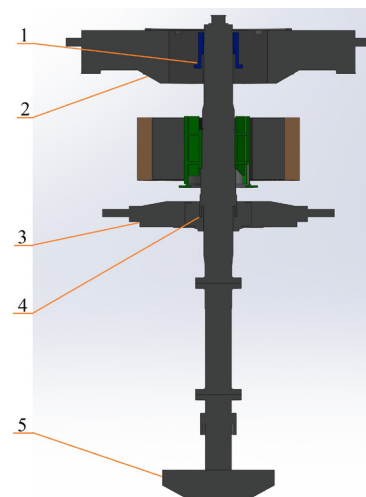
Three-dimensional model of the structure of the reconstructed hydrogenerator-motor in a cross-section: 1 – upper bearing; 2 – upper crosshead; 3 – lower crosshead; 4 – lower bearing; 5 – turbine bearing
